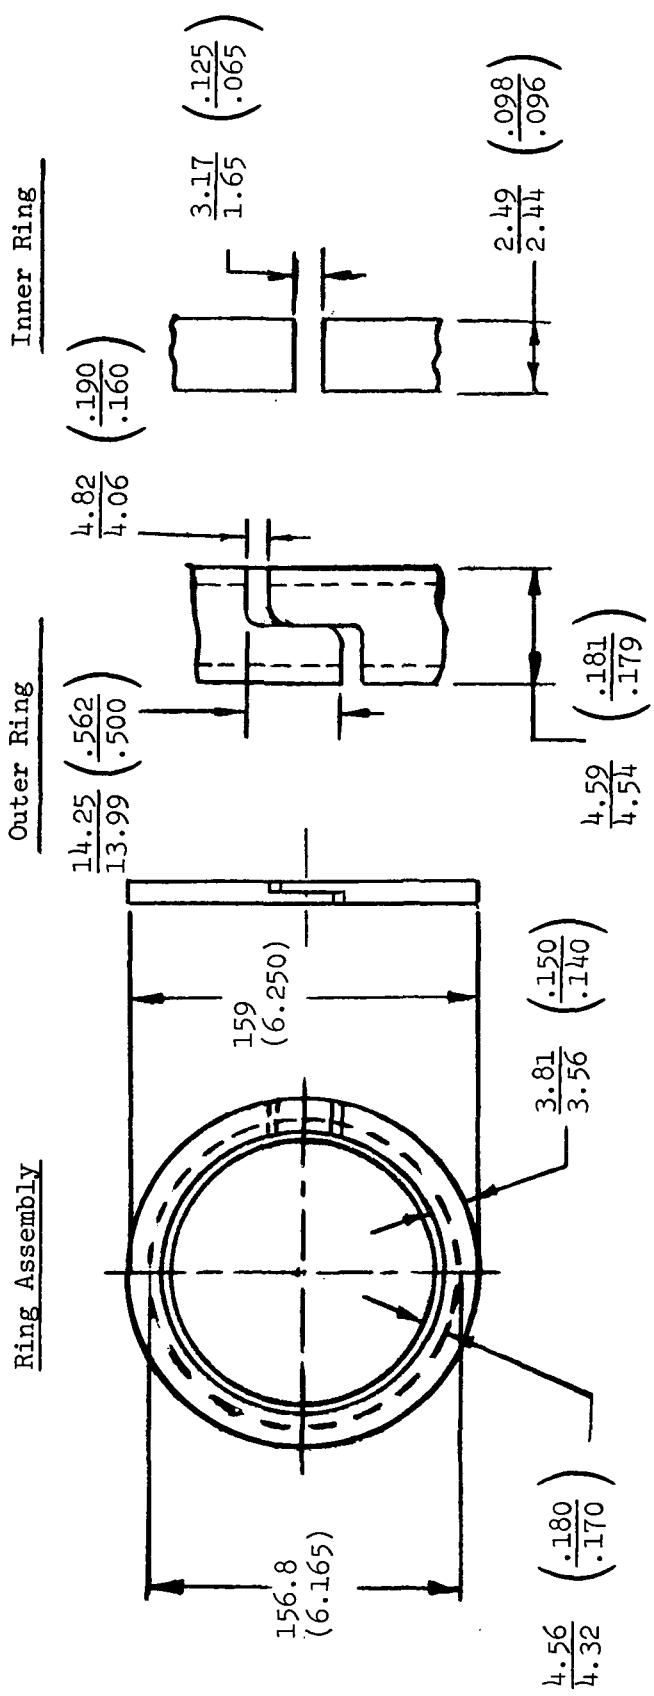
Two Piece Step Cut Ring. Dimensions are in m.m. (inch).
